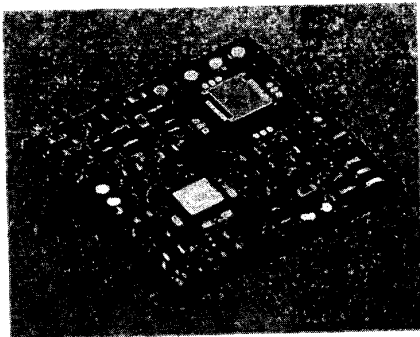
The packaged gyroscope mounted on PCB with ASIC.
